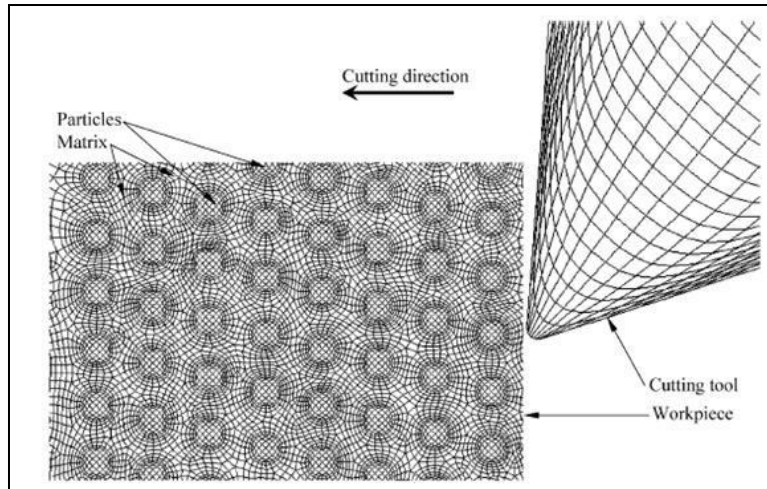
Workpiece and tool for MMC machining simulation [48]
